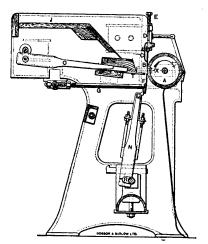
A.—Section of Single Macarthy Cotton Gin.
